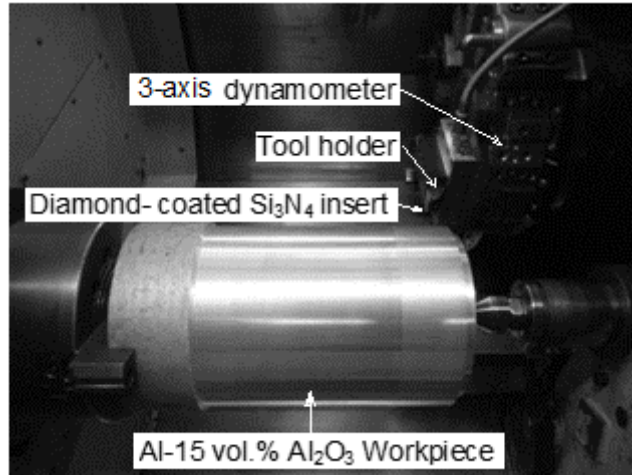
Experimental set up for turning tests of Al-MMC workpiece material.
